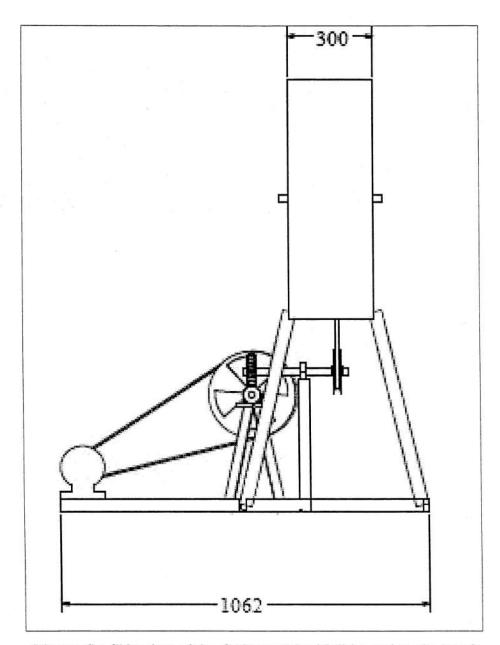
Side view of the CAD model with Dimensions in 'mm'
